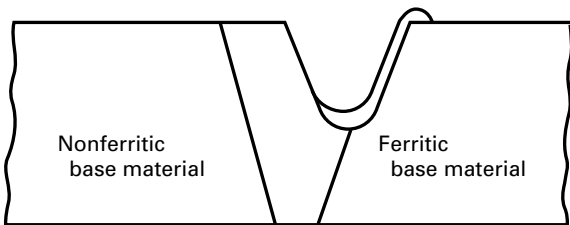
TEMPER BEAD WELDING AND WELD TEMPER BEAD REINFORCEMENT OF DISSIMILAR METAL WELDS OR BUTTERING
